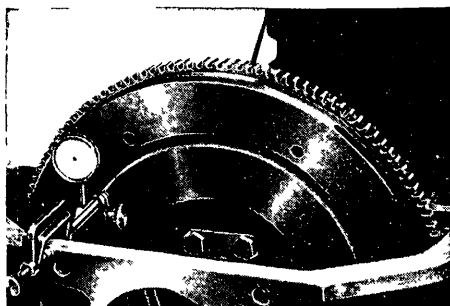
Checking flywheel runout with dial indicator. 1935-52
